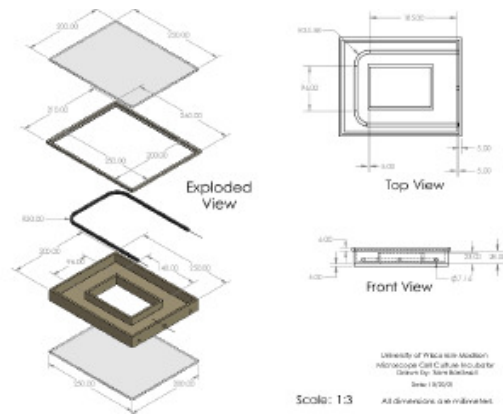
Solidworks drawing showing more detailed dimensions of all the parts in the incubator.
